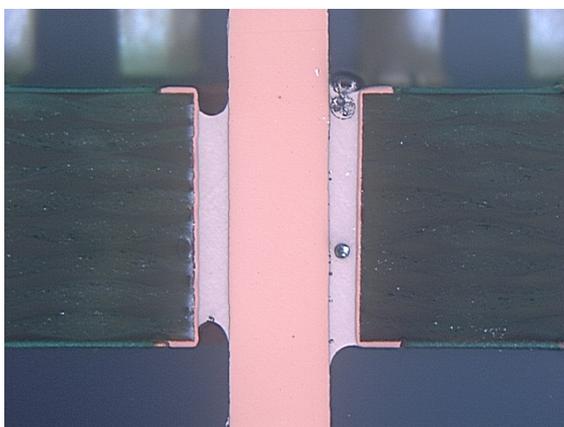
Note the lack of solder in this PIP through-hole solder joint.
